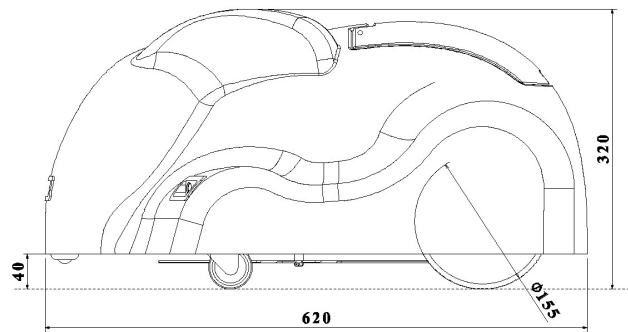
Main Dimensions of the Autonomous Lawn Mower (Side View)
